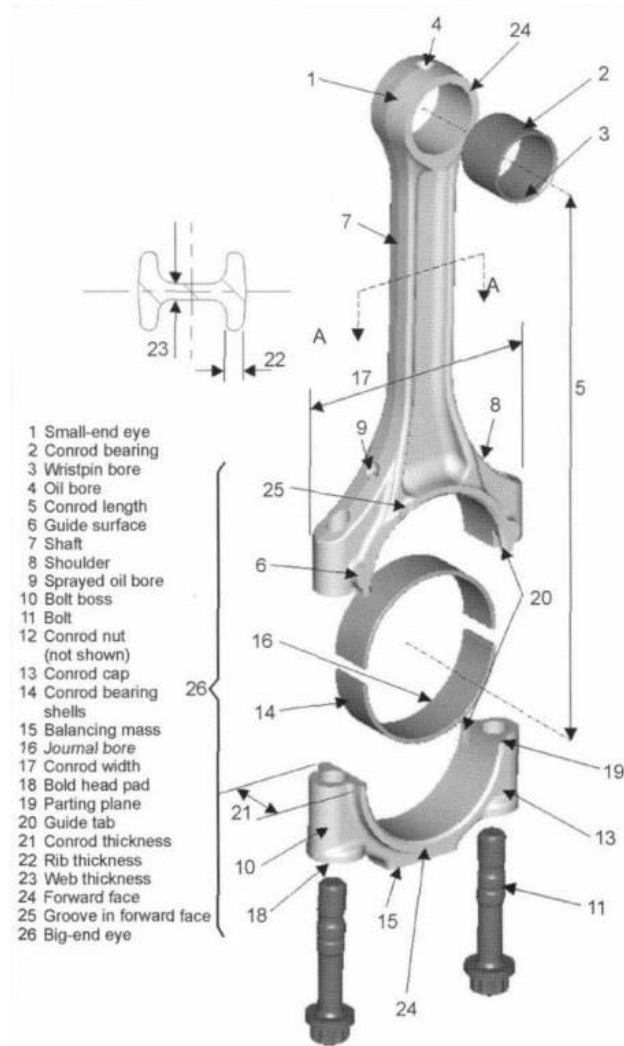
Geometry and designations for a connecting rod with connecting bearing [15]
